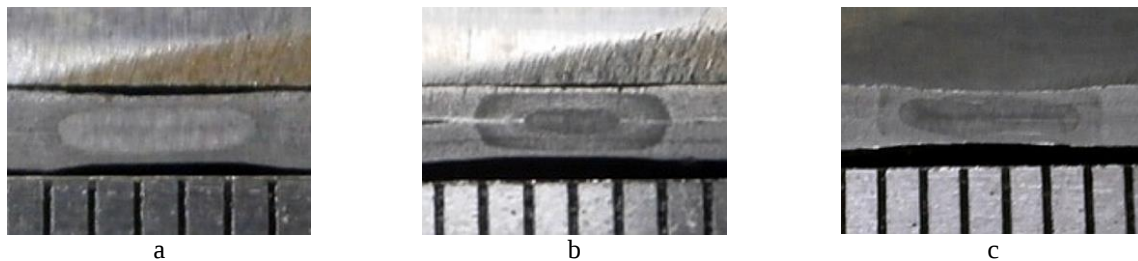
Welded spots: a – good quality; b – incomplete fusion; c – metal spitting
